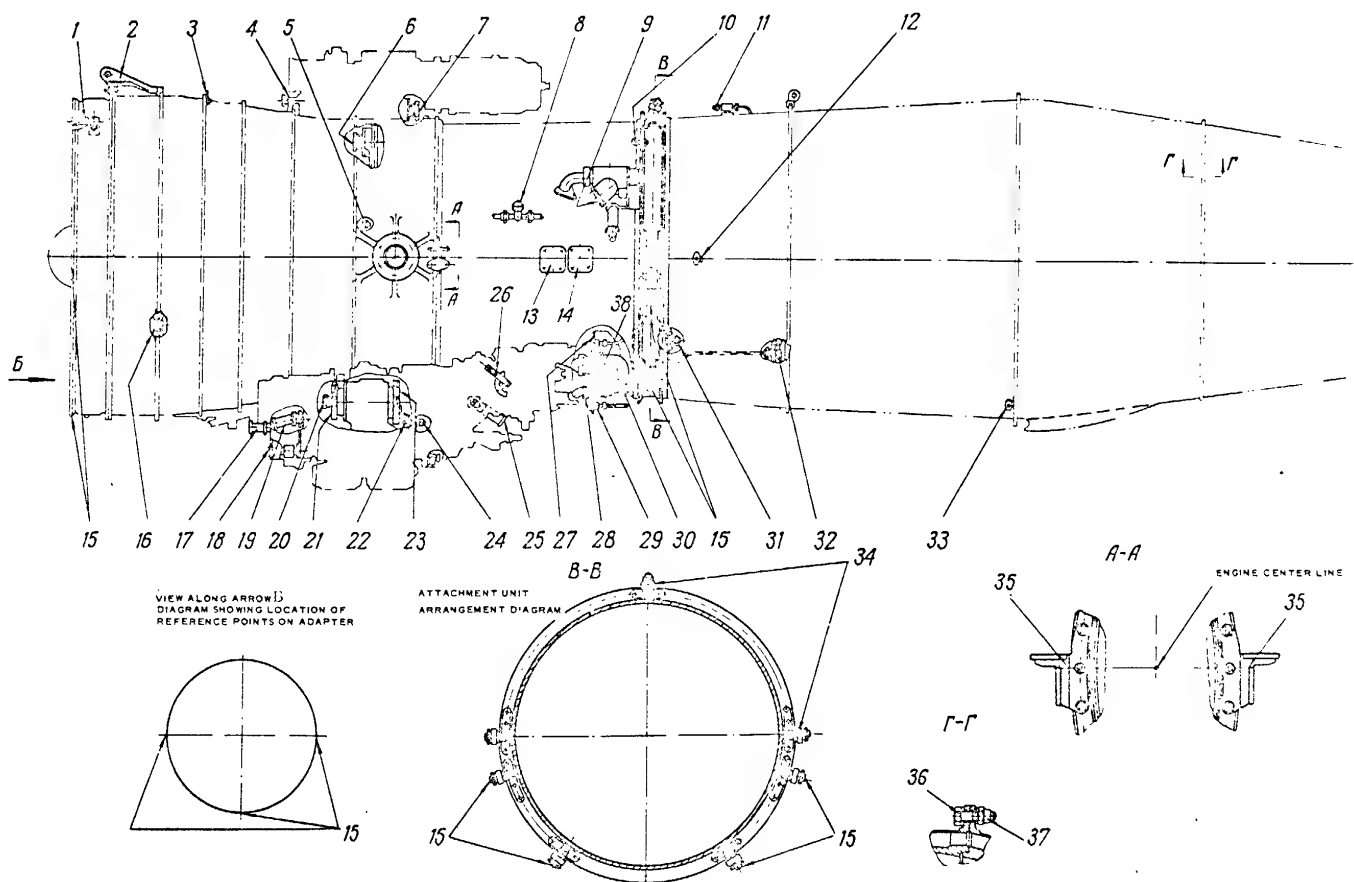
ENGINE OPERATING PARAMETERS MEASUREMENT POINTS
